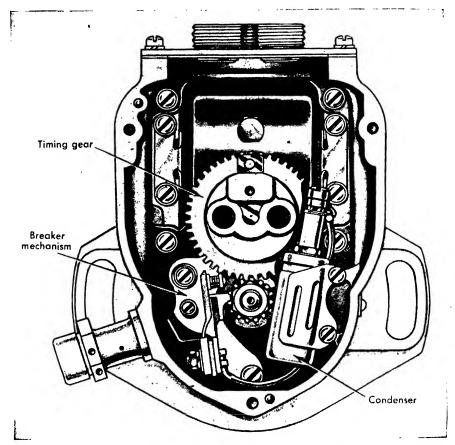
A cutaway view showing condenser, breaker mechanism, and timing gears of an aircraft magneto. (Courtesy Eisemann Corporation)
